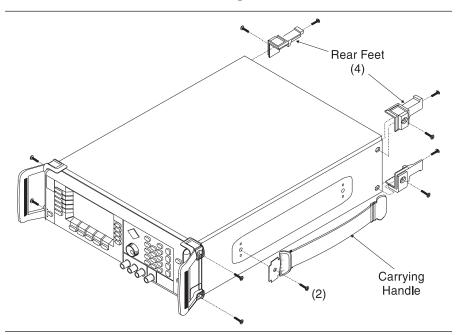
Front Handle, Feet, and Carrying Handle Removal
